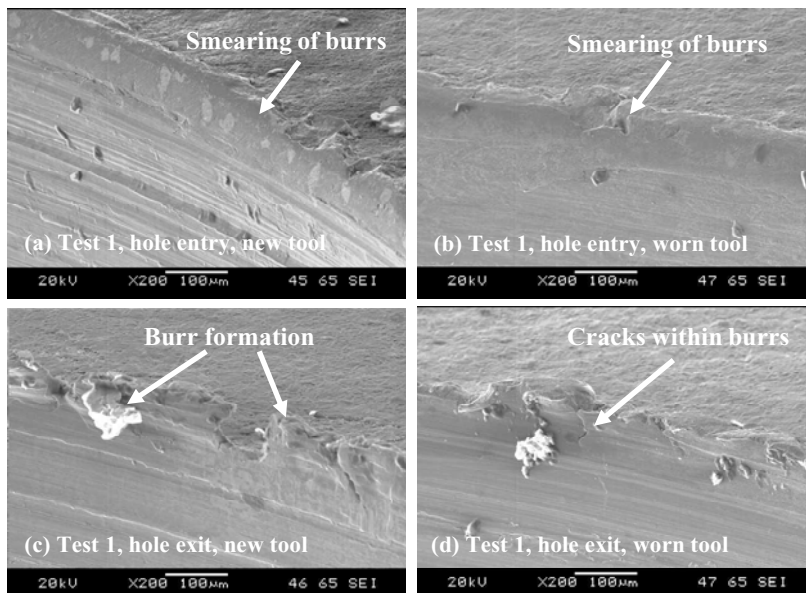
Images of burring; (a) Test 1 (6.5 mm depth drilled), entry; (b) Test 1, (845 mm depth drilled), entry; (c) Test 1, (6.5 mm depth drilled) exit; (d) Test 1, (845 mm drilled) exit
